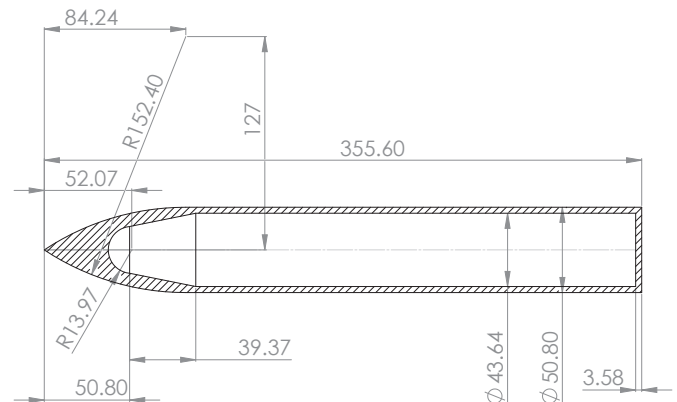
Dimensions of SAP projectile. All dimensions are in millimeters.
